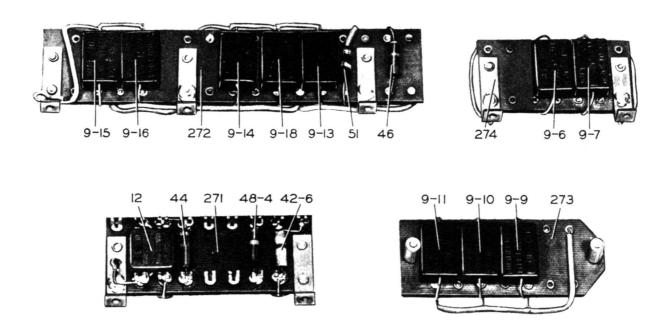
RADIO RECEIVER BC-348-B: RESISTOR BOARDS, VIEW B
